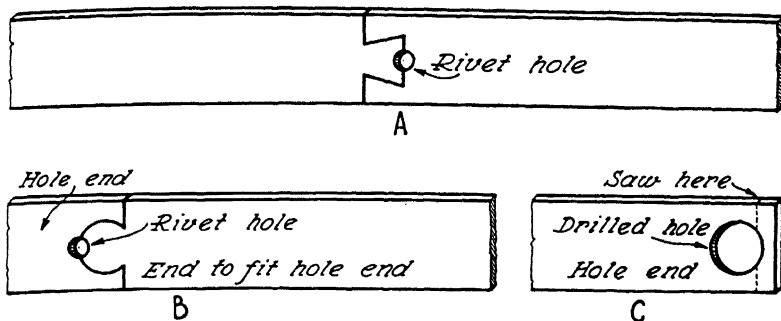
A and B, suggested ring joints; C, detail of construction for hole end used for B-type joint. Rivet holes are drilled after joint is assembled
